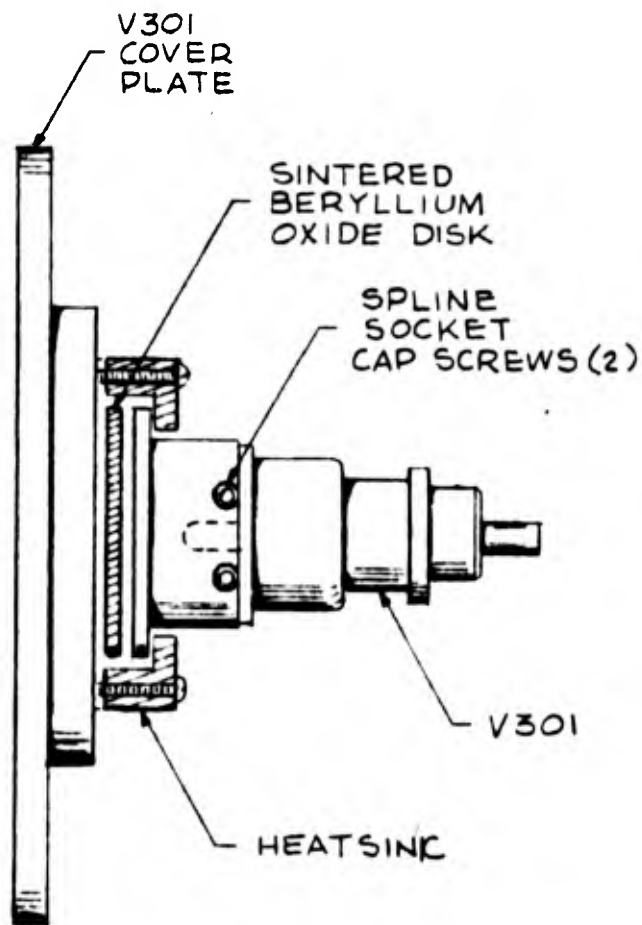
V301 AND COVER PLATE ASSEMBLY, CUT-AWAY VIEW.
